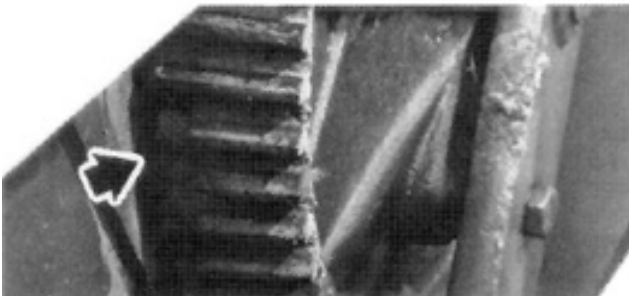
Chipped Teeth on the Packer Finger Crown Gear.
